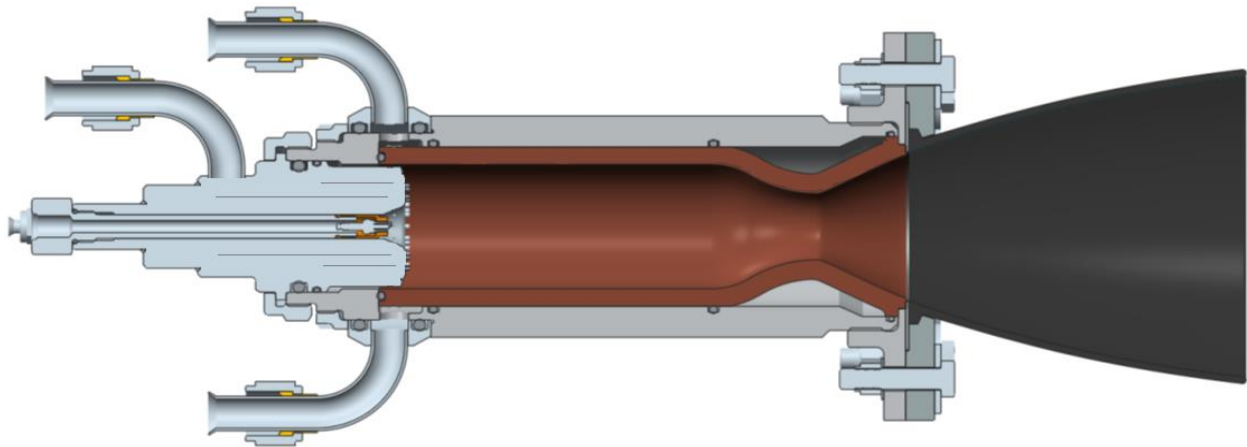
1.2K lb_f Thruster with Additively-Manufactured GRCo-84 Liner and C-C Nozzle Extension.
